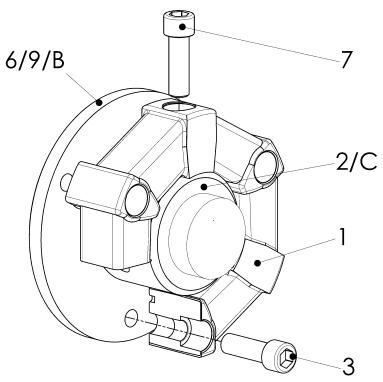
Mounting the rubber element (Type 008A-00001...00012-.N..)
